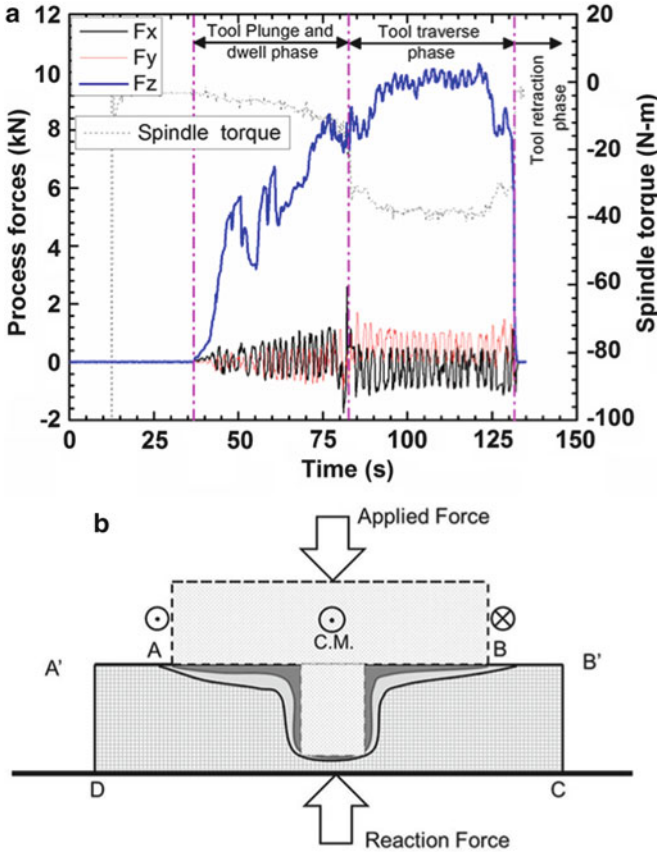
(a) The temporal variation of forces F_x , F_y and F_z acting on the tool during friction stir welding. (b) Schematic transverse section of friction stir welding tool and workpiece with the tool rotating in counterclockwise direction and is moving out of the plane of the paper with the forces acting
